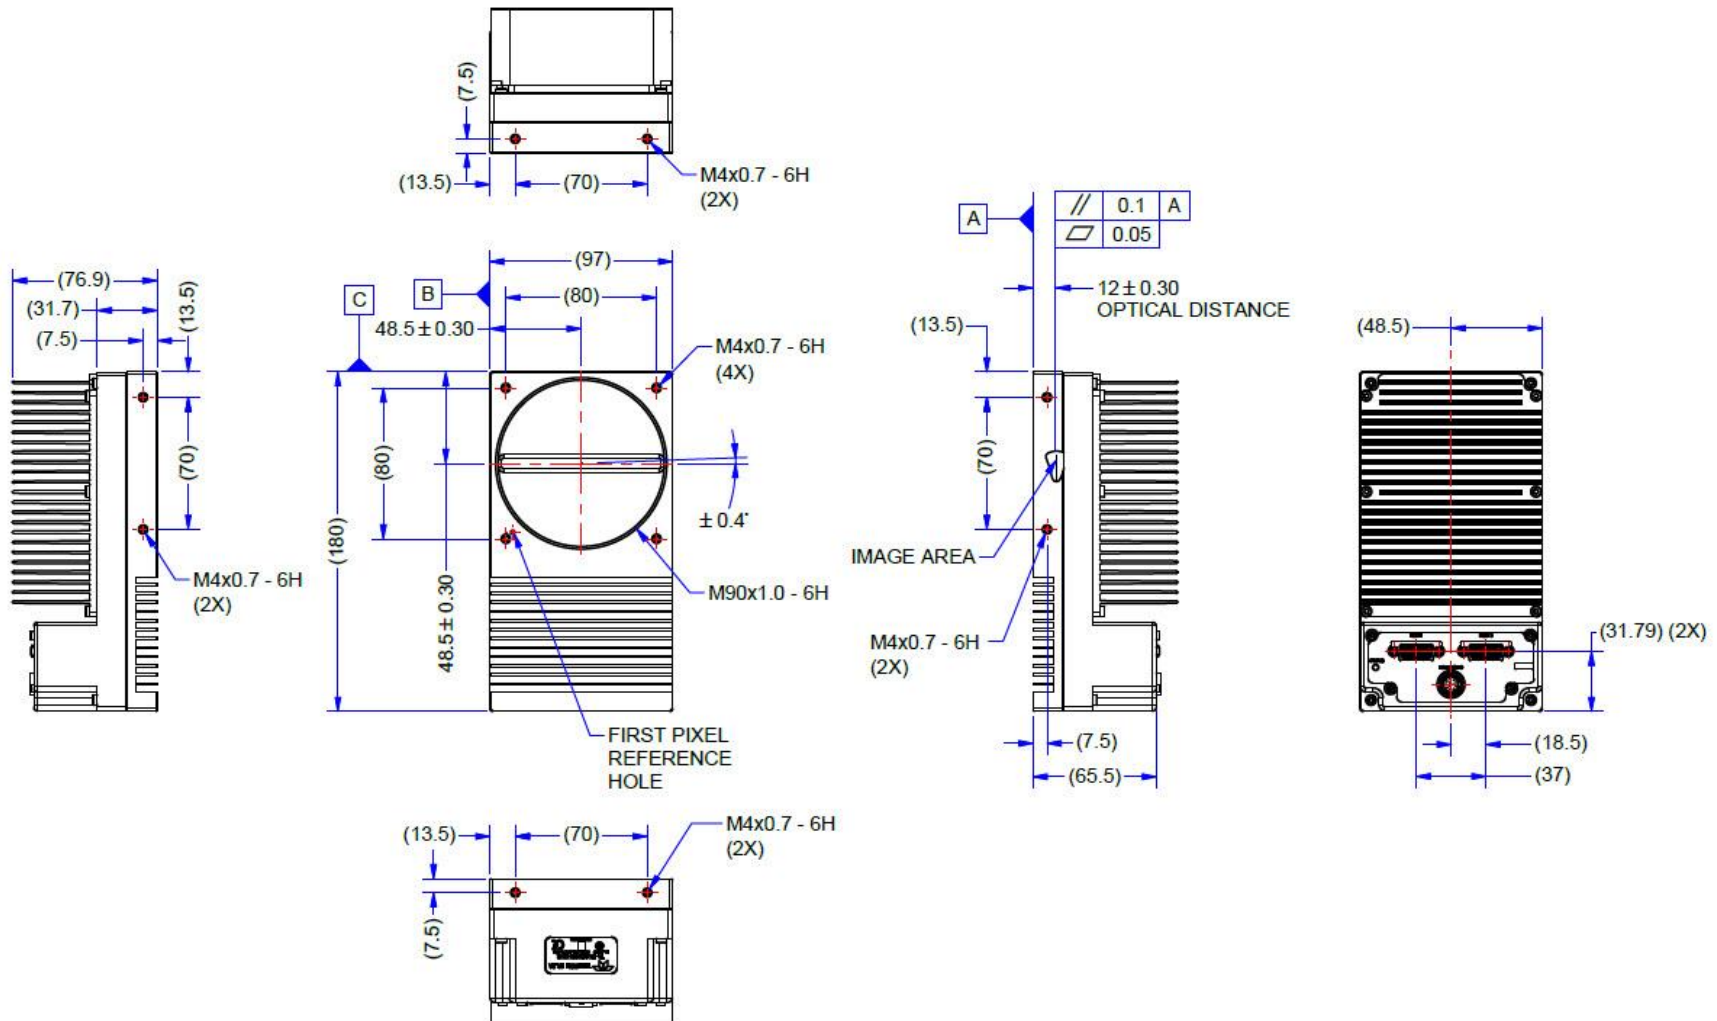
H2-HM-16K100H-00 Mechanical Drawing
